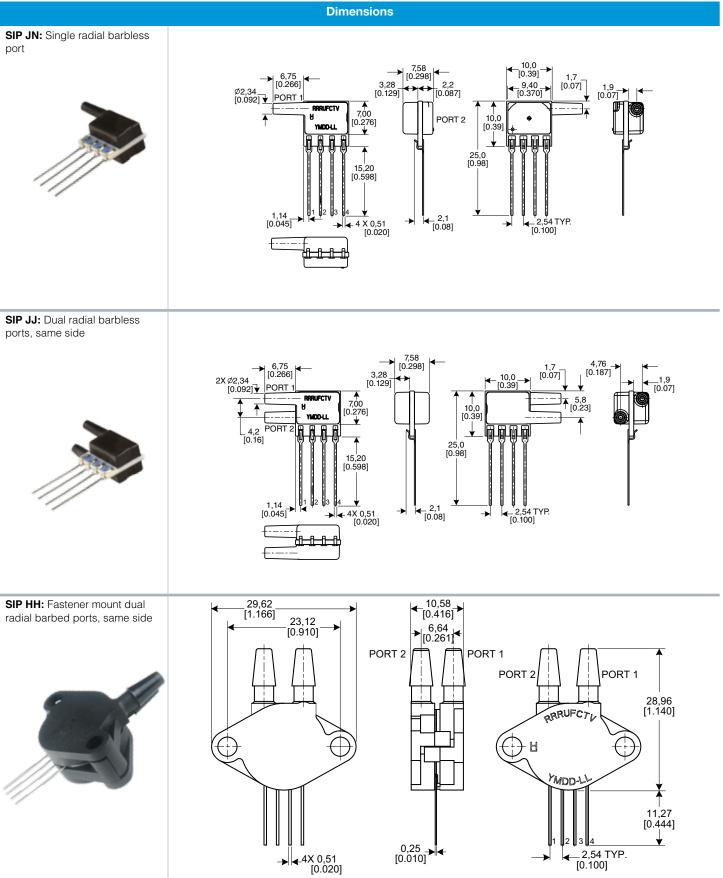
SIP Package Dimensional Drawings (For reference only: mm [in].)
